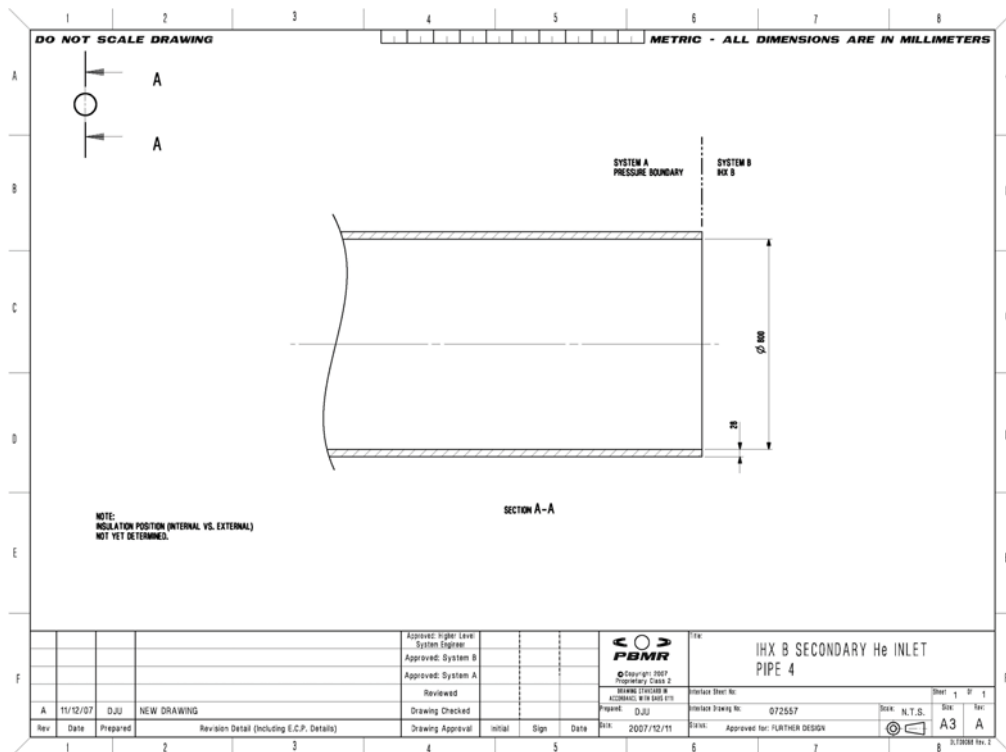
IHX/Piping Interface Drawing Pipe 4
